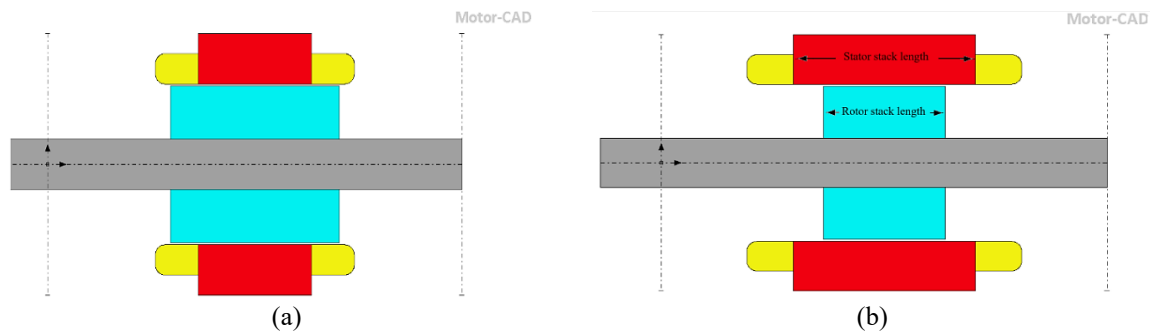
Uneven rotor and stator length SRM: (a) stator shorter than rotor and (b) rotor shorter than stator
